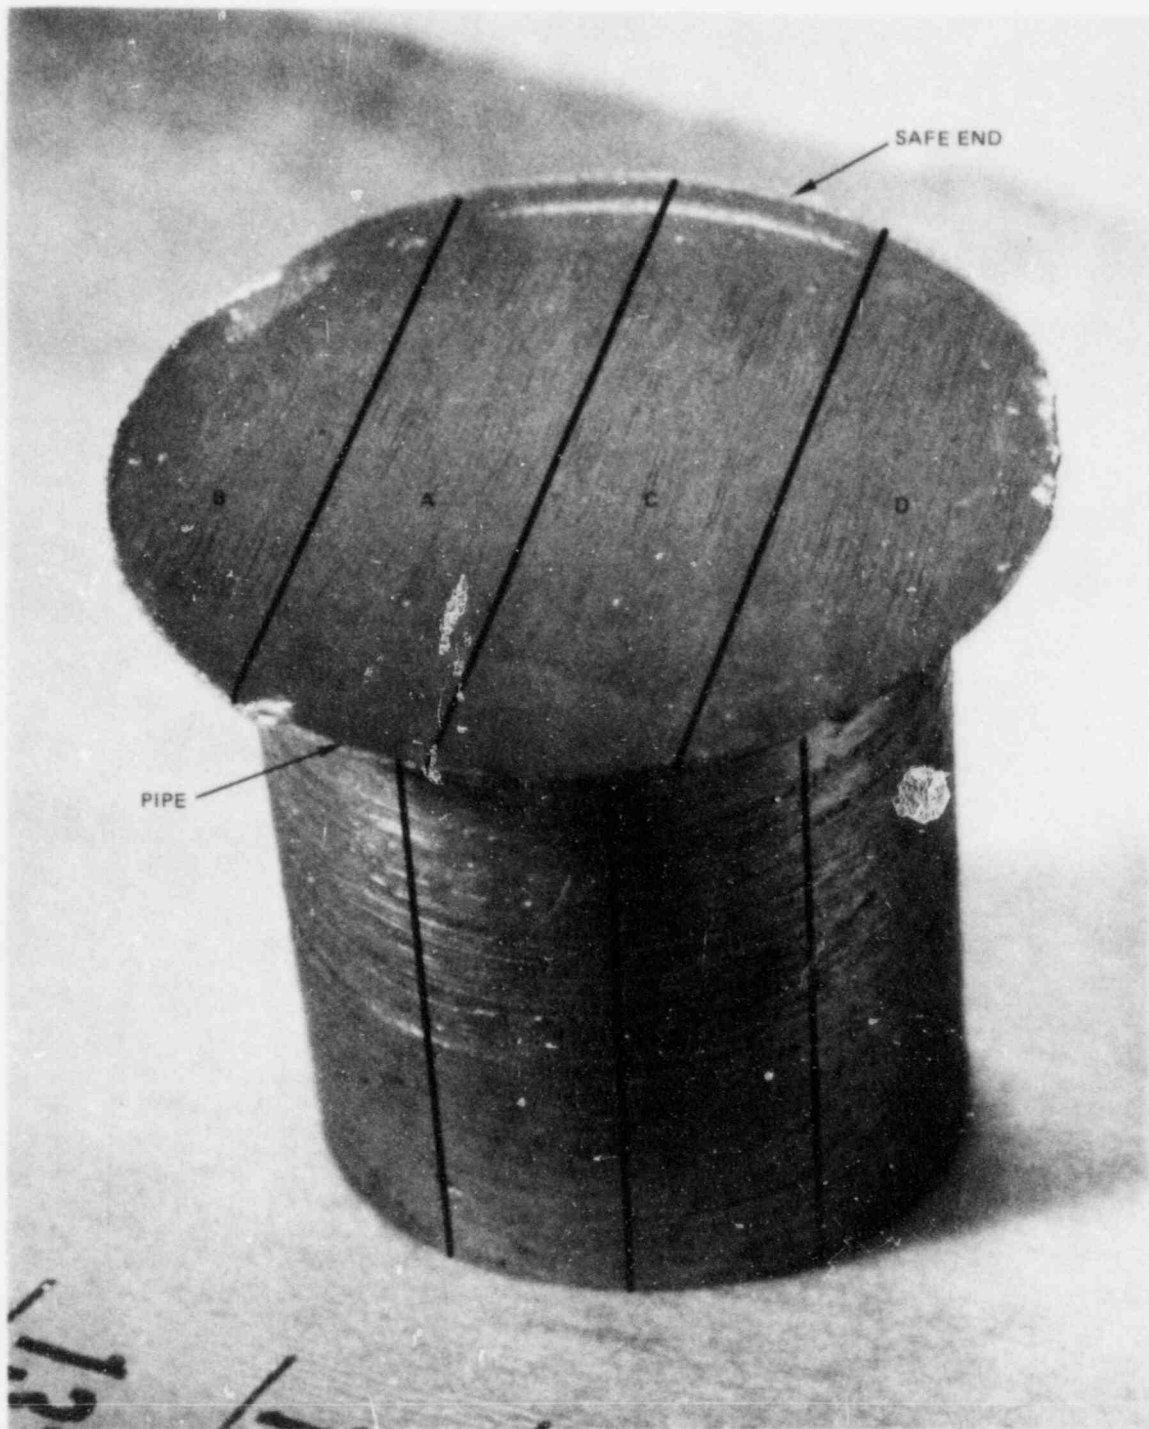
Core Sample Cutting Plan (all samples A, B C and D were mounted for optical microscopy with no cracking found in any section)
